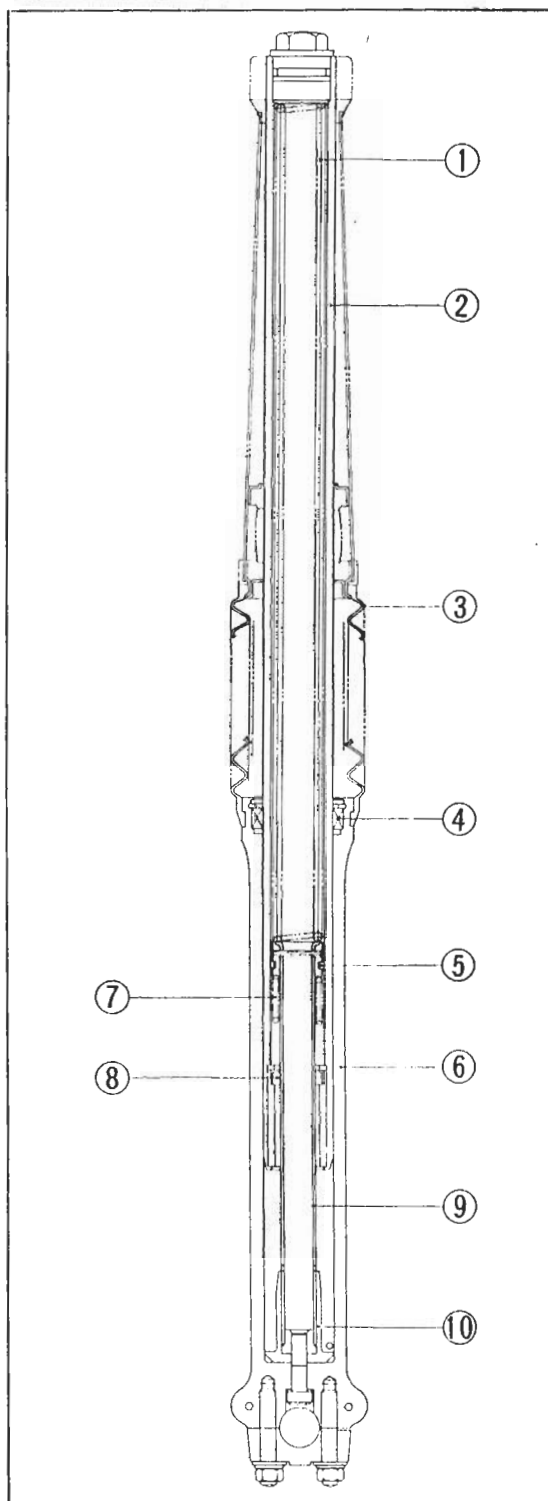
(1) Front spring (7) Front rebound spring (2) Front fork pipe (8) Free valve (3) Front fork dust seal (9) Bottom pipe (4) Oil seal (10) Oil lock piece (5) Piston ring (6) Front fork bottom leg
